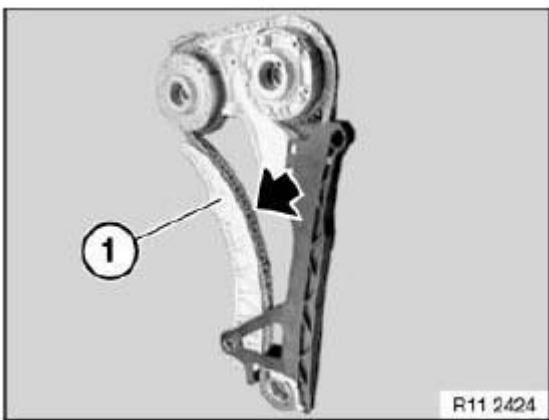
Securing Timing Chain Guided In Clamping Rail
